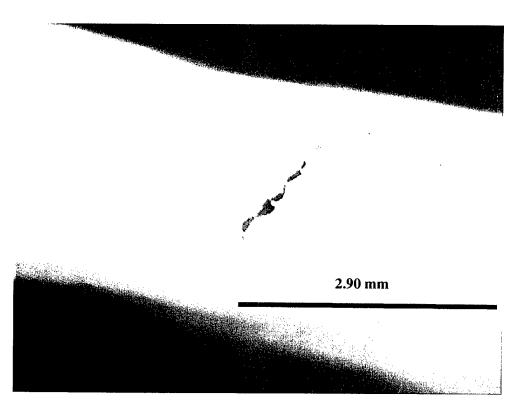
Typical damage caused by tying the cable wire to the bend test fixture. This cable had been soaked in Cryotech.
